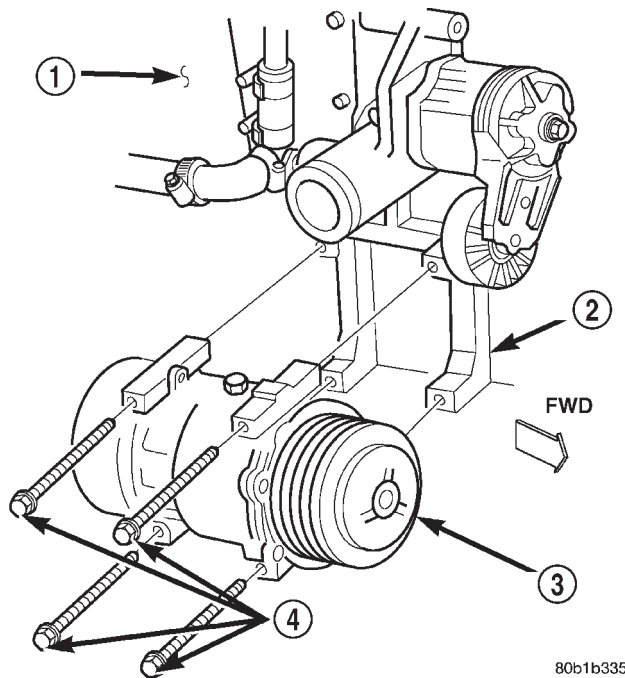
COMPRESSOR REMOVE/INSTALL - DIESEL ENGINE
